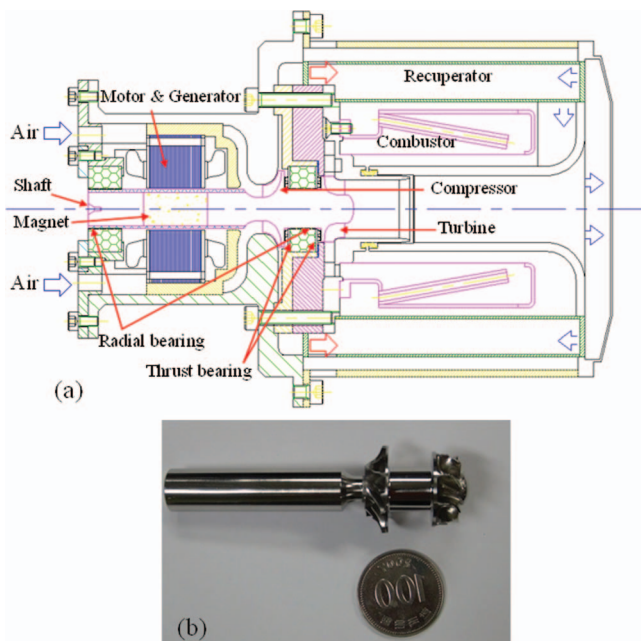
(a) Layout of MTG. (b) Fabricated rotor for MTG.
